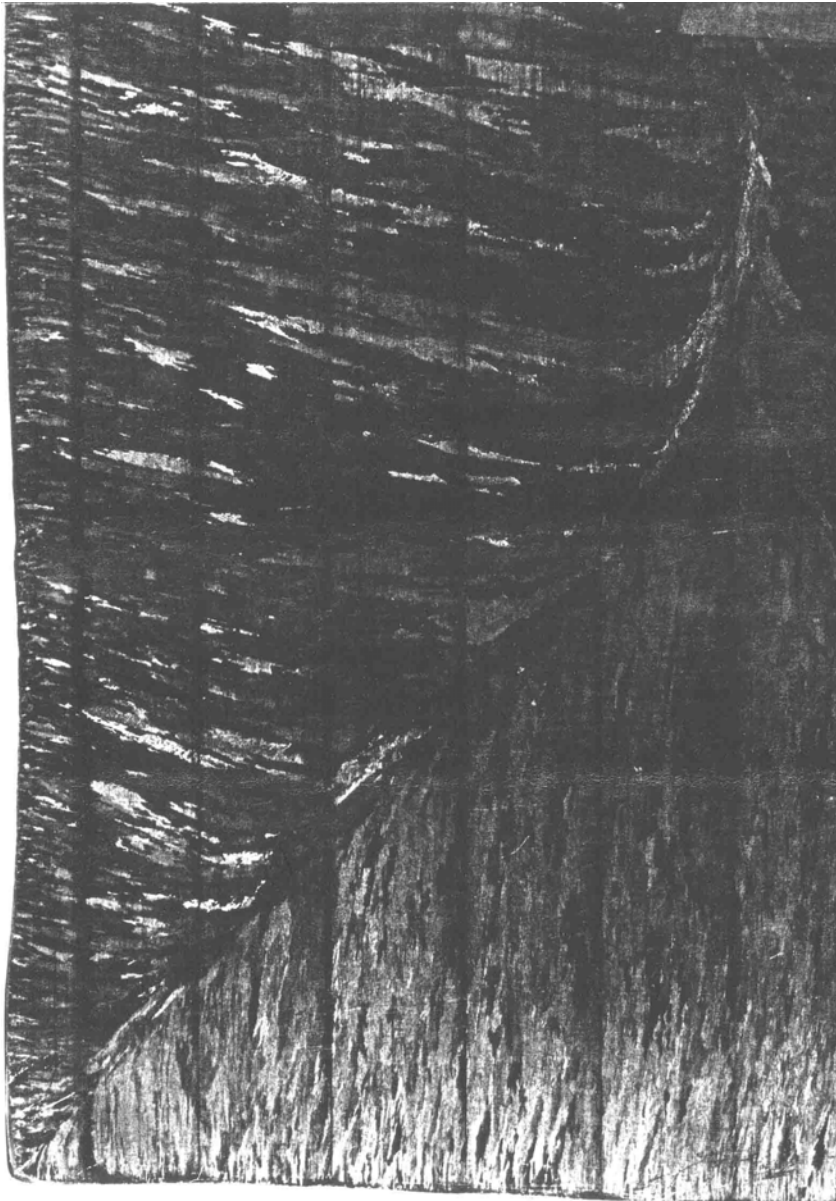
Example of longitudinal off-corner surface depression or *gutter* on the wide face of a 304 stainless steel slab (transverse section near corner on inner radius).
